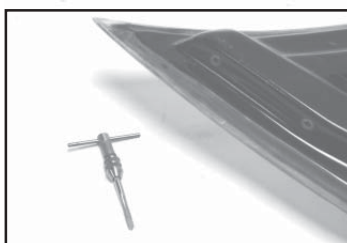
Use a 6X1 mm tap to clean out any stubborn threads.
